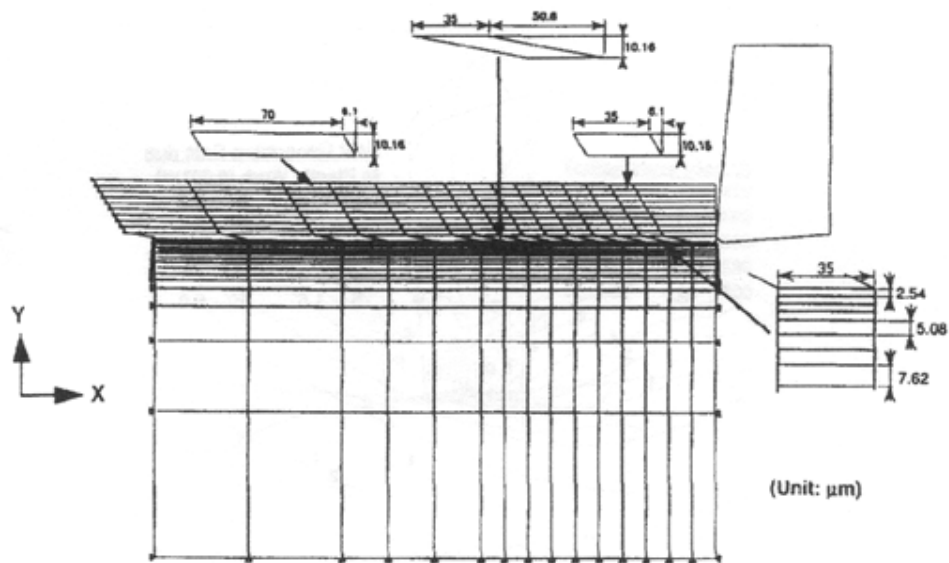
The initial finite element mesh, configuration of the cutting tool and dimensions of the elements developed by Shih [52].
